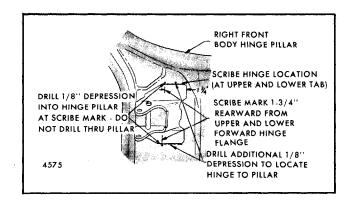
Locating Hinge Position on Body Hinge Pillar - X Styles
